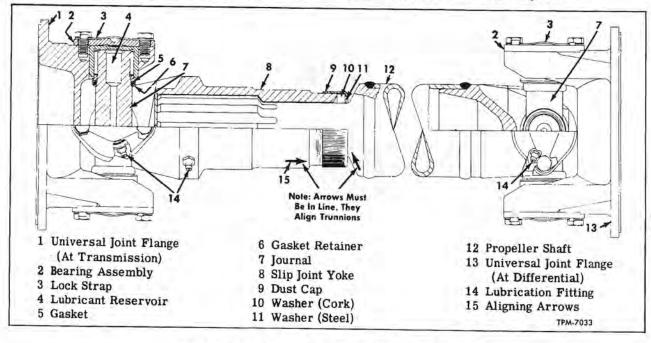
Cross Section of Propeller Shaft Assembly (Typical)
